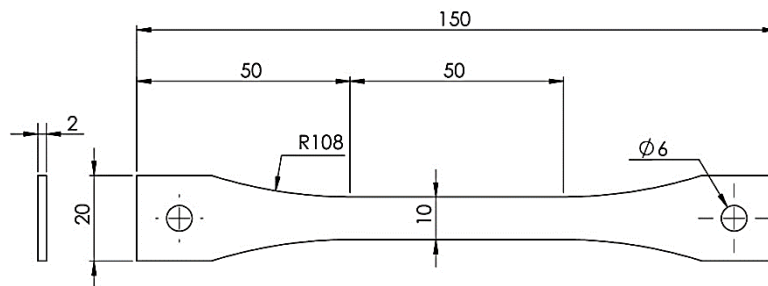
Dimensions of the bulk tensile specimen used in accordance with standard BS 2782 (dimensions in mm).
